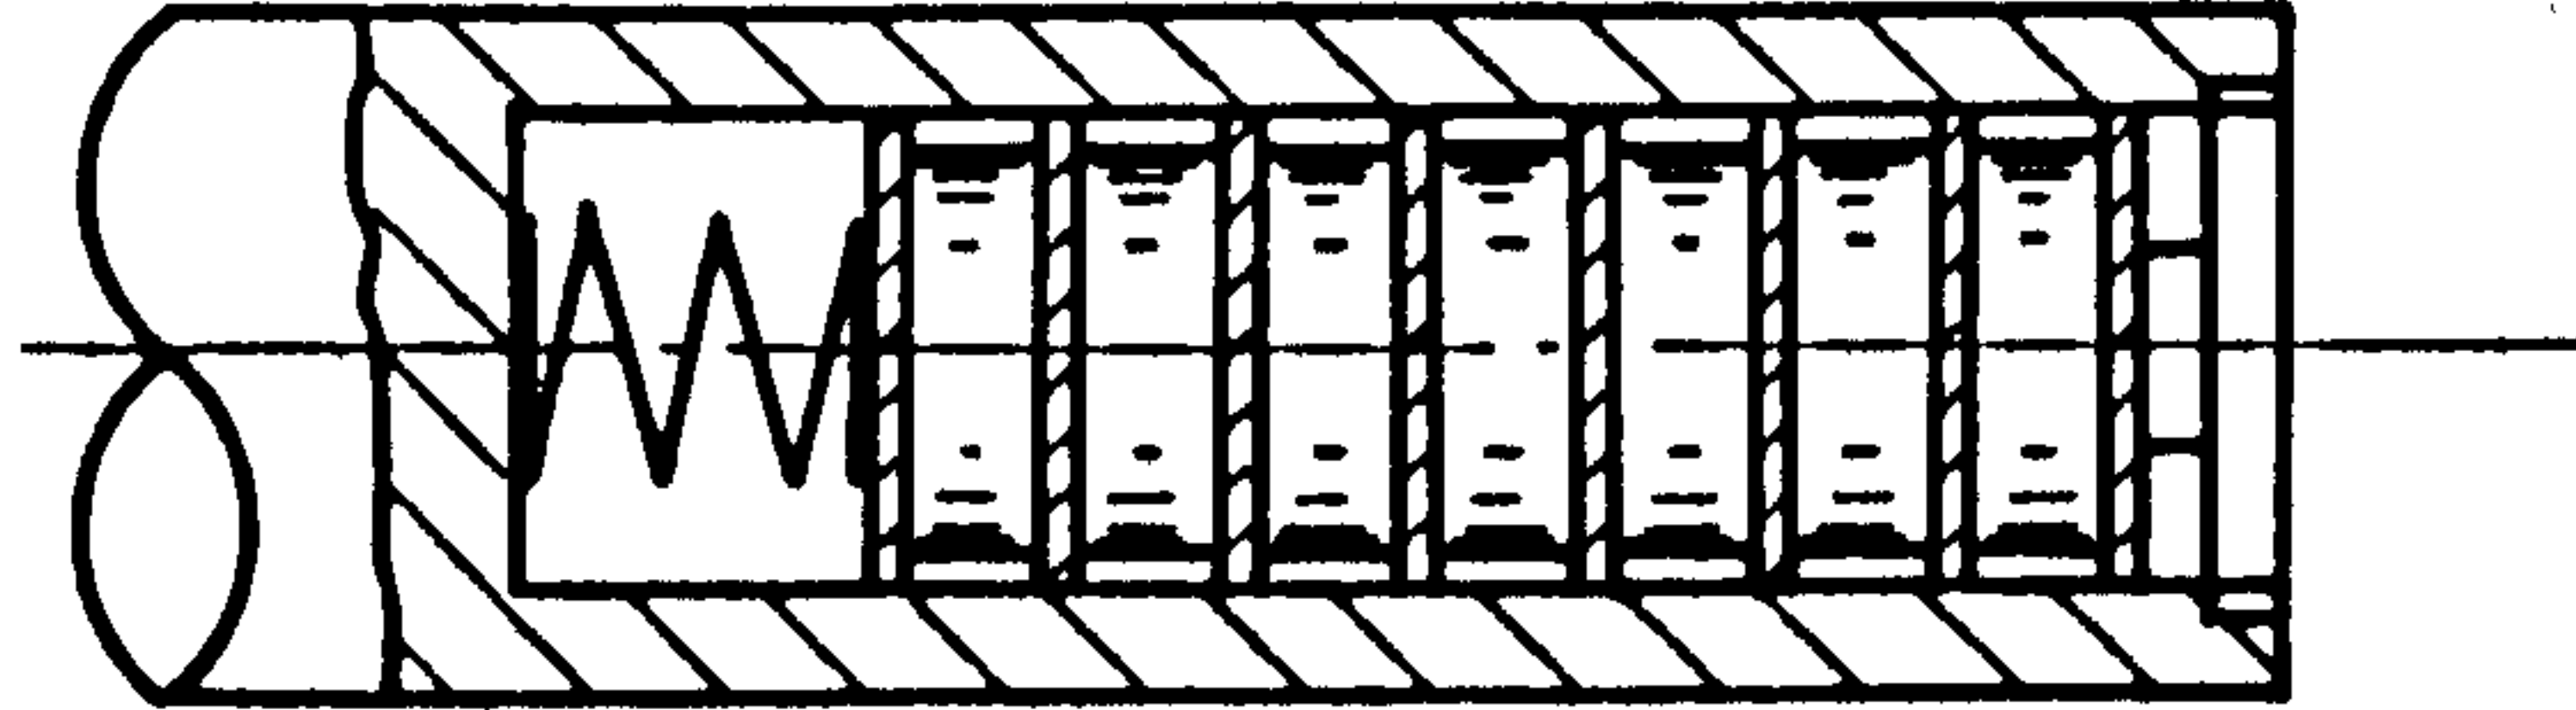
A schematic drawing of the De-Vibrator showing a set of inertial discs held by a light spring.
